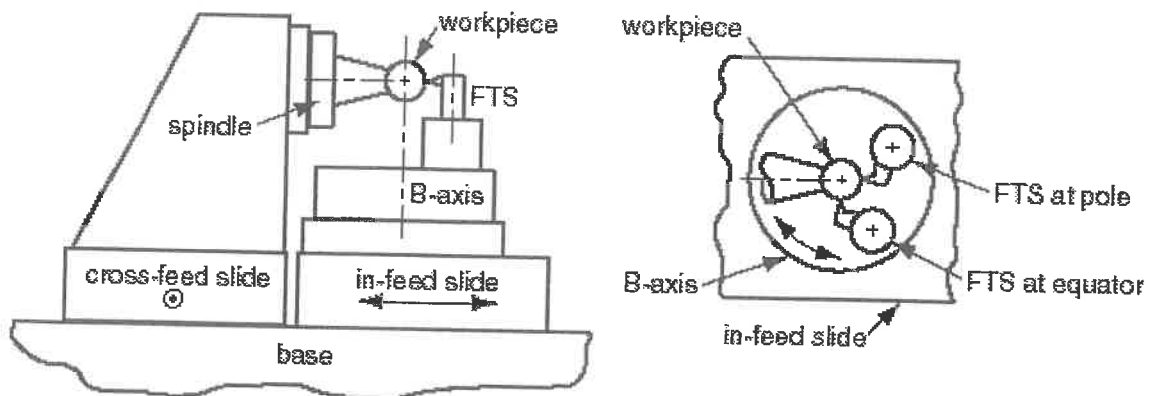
Sketch of a fast tool servo set up on a two-axis lathe with a B-axis for machining a spherical workpiece. Side view (left). Top view (right) showing tool at equator and at pole of workpiece.
